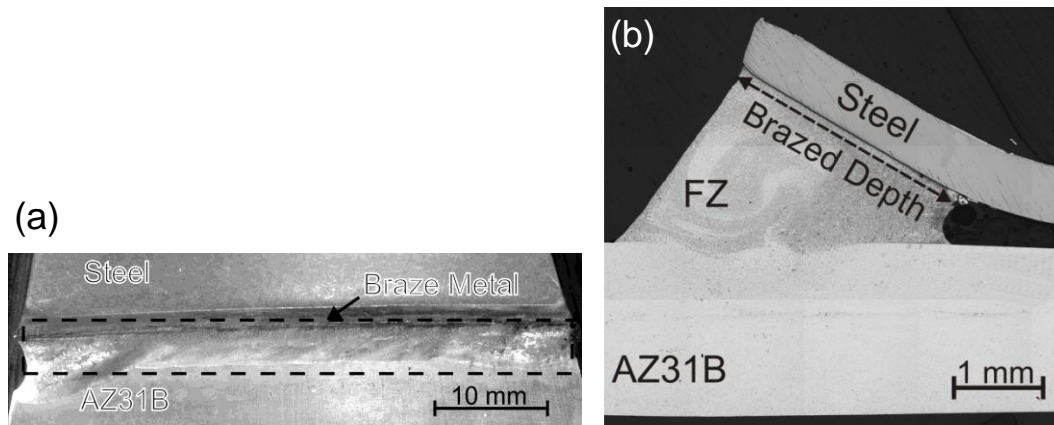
Laser brazed AZ31B to steel sheets made using 8 mm/s travel speed and 2.2 kW laser beam power: (a) top bead appearance and (b) transverse section with using Al-12Si coated steel.
